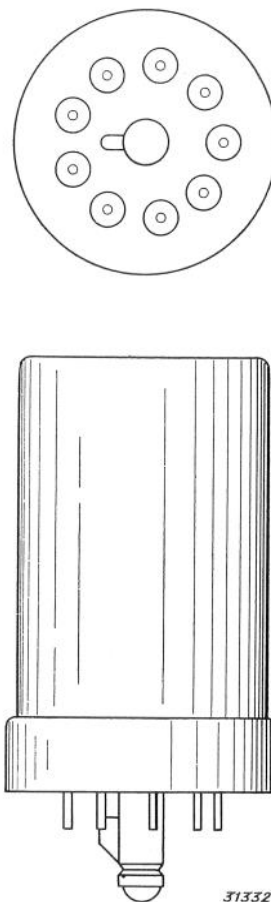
Drawing of the finished valve with protecting tube and pointed cam.
